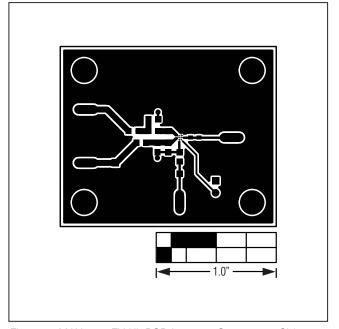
MAX9911 EV Kit PCB Layout—Component Side
